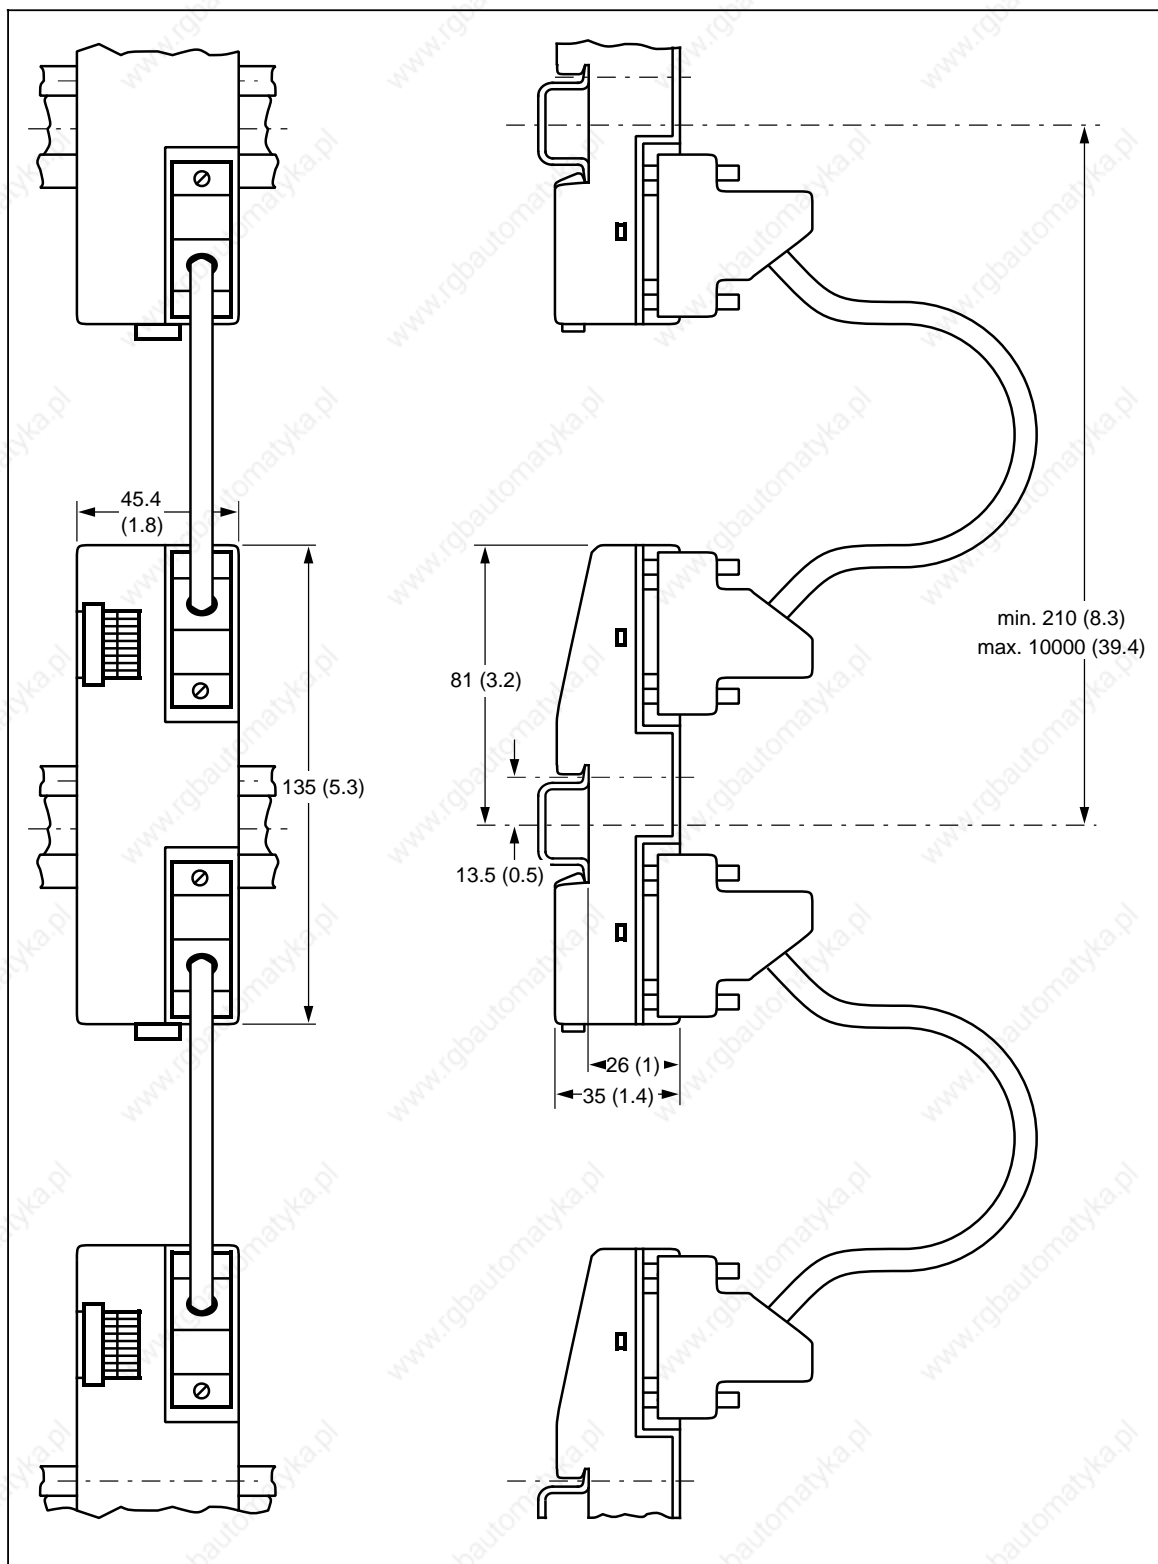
Dimension Drawing of the IM 316 Interface Module (6ES5 316-8MA12)
